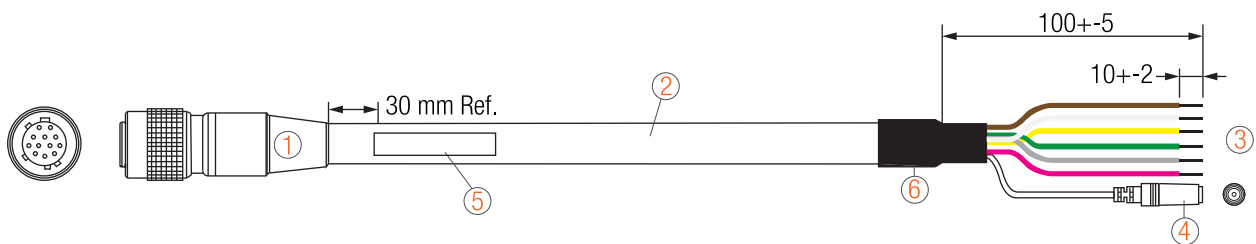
CBL-MT-PWR-SYNC-3M0 drawing
